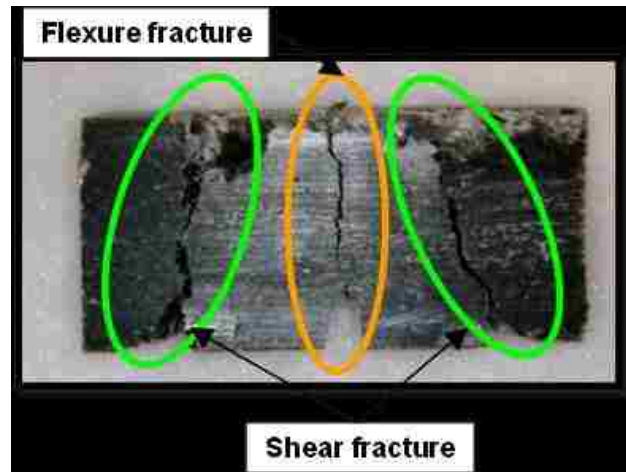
Failure mode of Charpy impact test of PC specimens.
